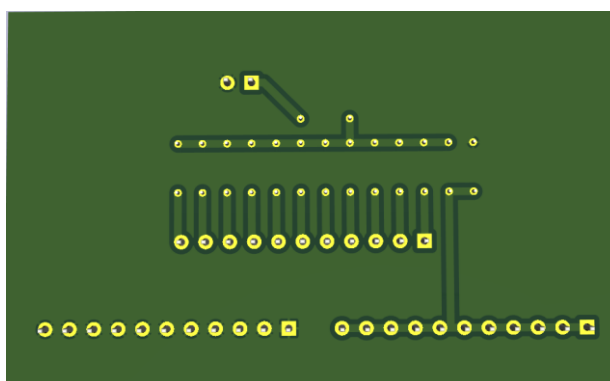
Resistor Bridge PCB Bottom View (KiCad 3D view)
